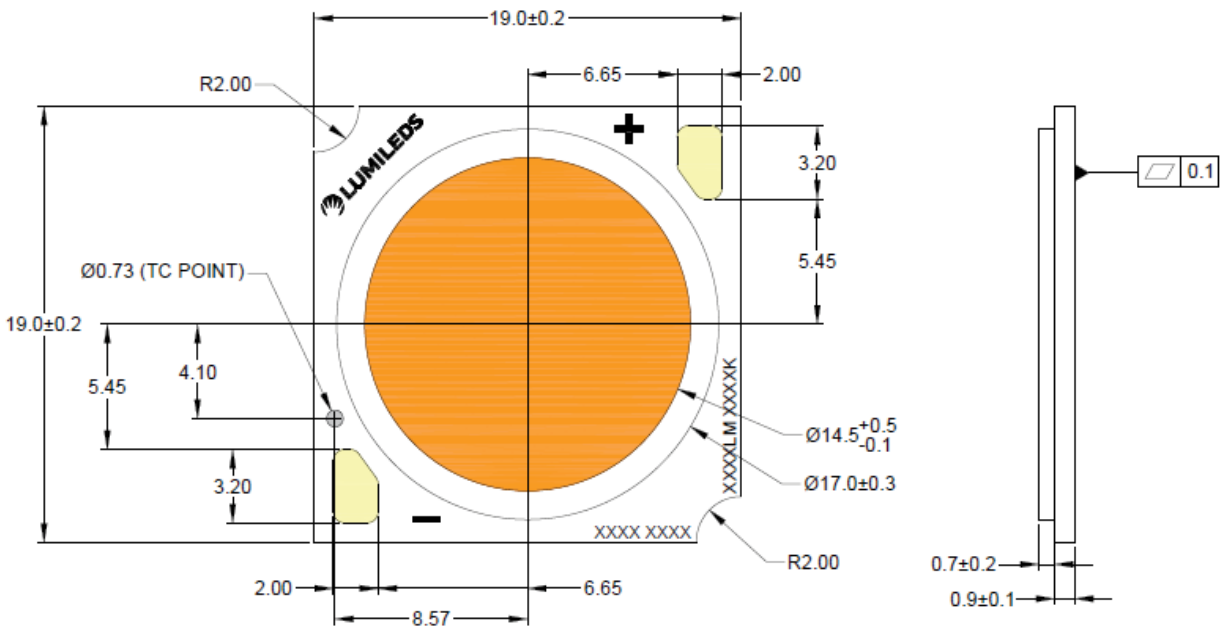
Mechanical dimensions for L2C6-xxxxxL08x1500 and L2C6-xxxxxL10x1500.
